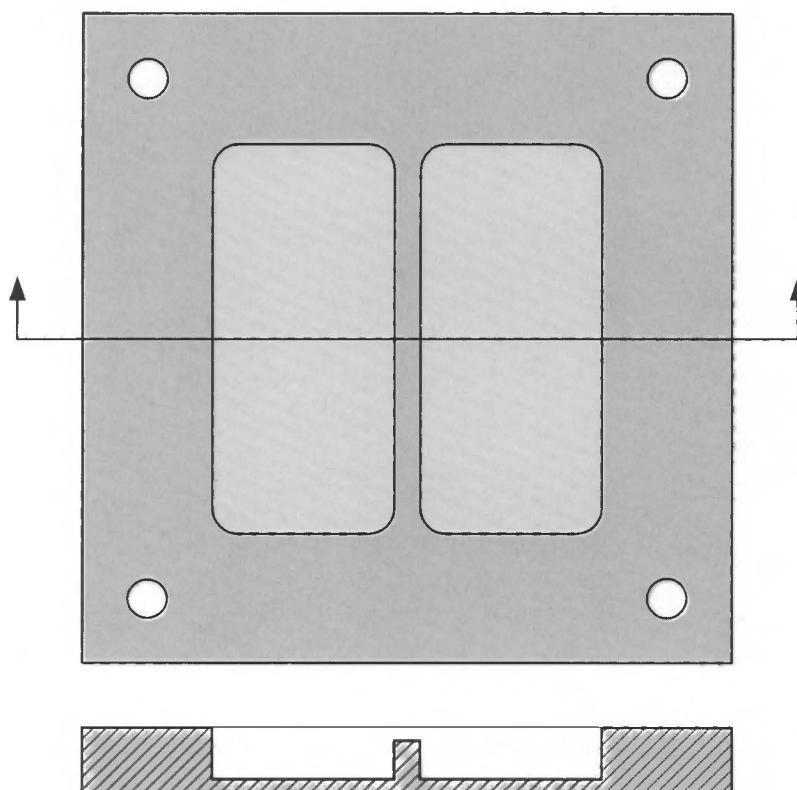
Schematic drawing of a built-in plate showing required stiffener configuration machined from 12mm thick mild steel base plate [29]
